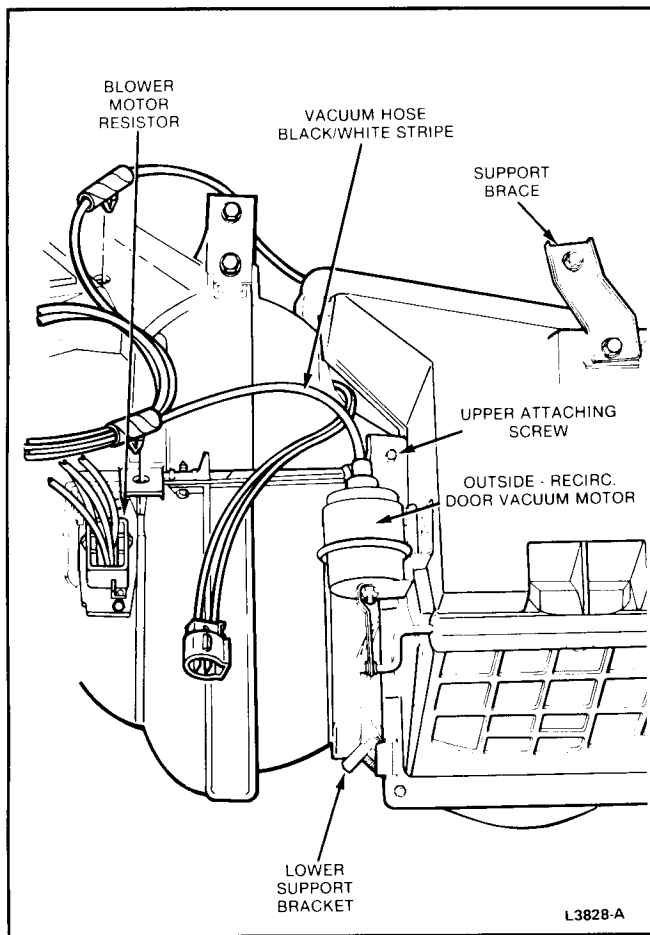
Air Inlet Duct and Blower Housing Assembly
